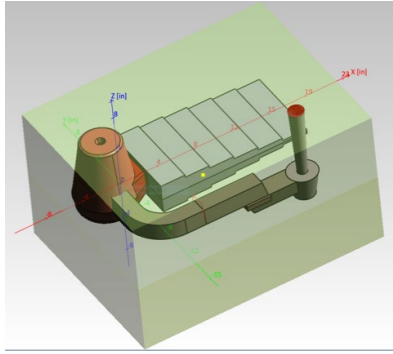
Casting configuration location with respect to the overall 24 in. x 19 in., 8 ½ in. over 6 in. the 1.25% phenolic urethane sand mold. Shown is the 3:1 sand to metal ratio casting. The 5:1 sand to metal ratio casting had the same length, same width, and gating/riser configuration as shown.
